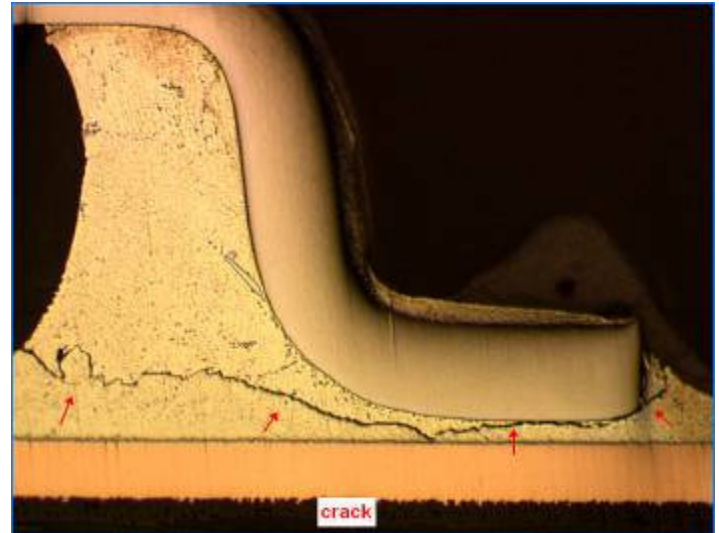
cross section, SN62, U61, right lead solder crack, 100x
